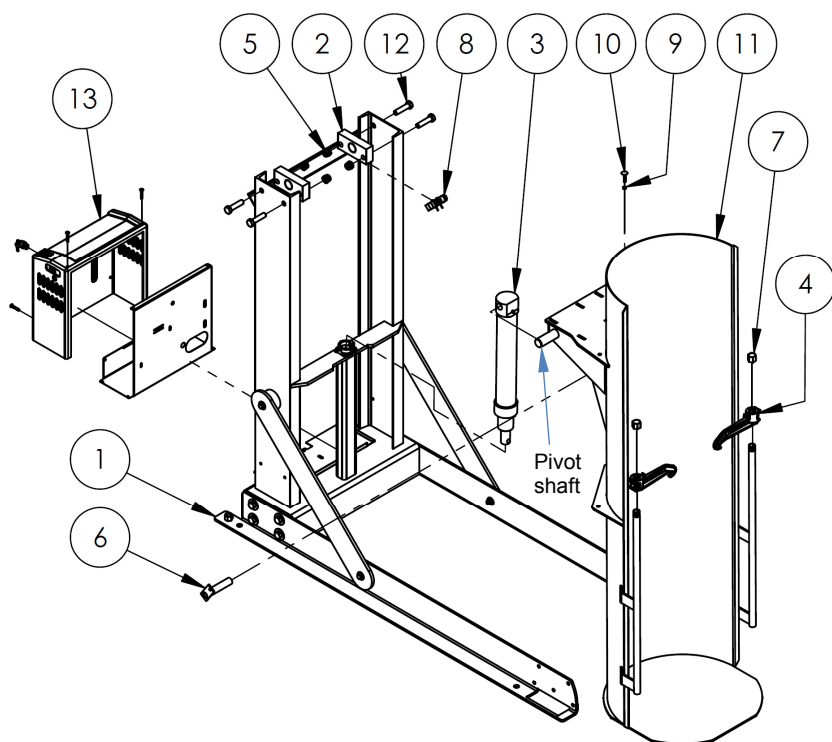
HDD-36-S series stationary dumpers exploded parts diagram and bill of materials
